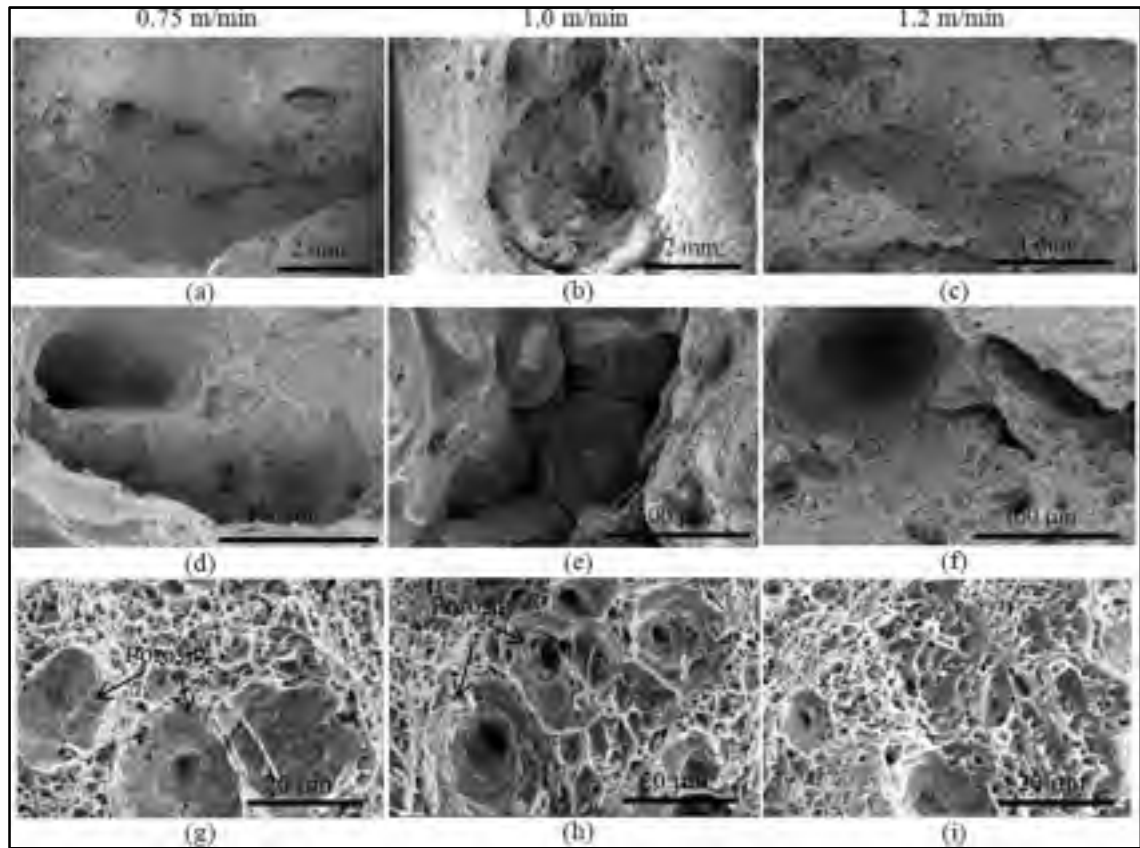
Secondary electron images of the tensile fracture surfaces for the welds assembled at welding speeds of 0.75 m/min (a,d,g), 1.0 m/min (b,e,h) and 1.2 m/min (c,f,i)
